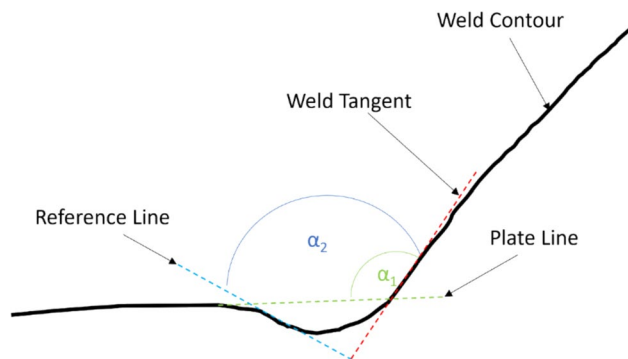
Possible definitions of the weld toe angle for HFMI treated weld
